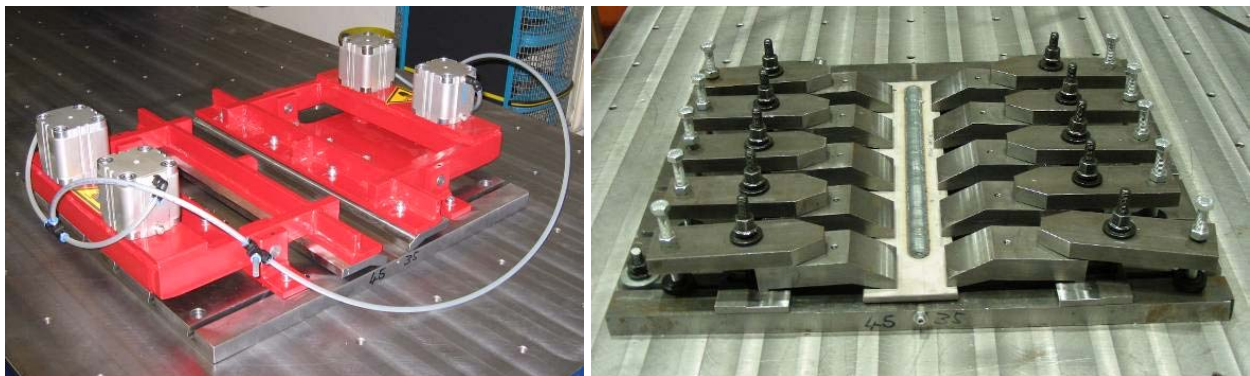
Pneumatic (left) and mechanical (right) clamping device for friction stir welding
